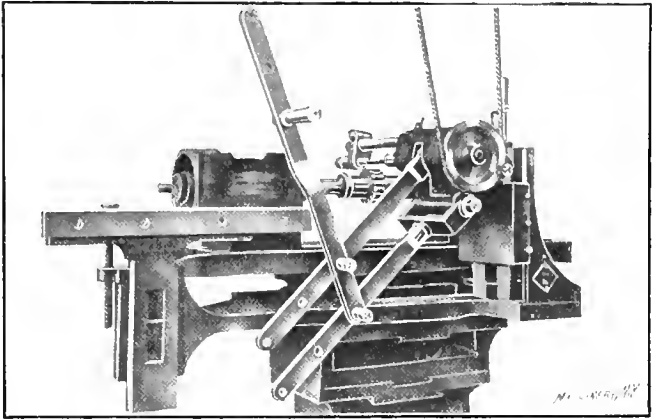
Front View of Machine rigged up for Milling Spiral Teeth.
